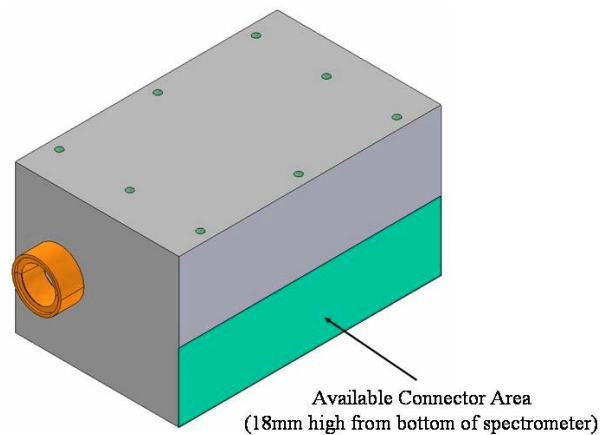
Connector mounting location (15mm from bottom edge towards optical input).
